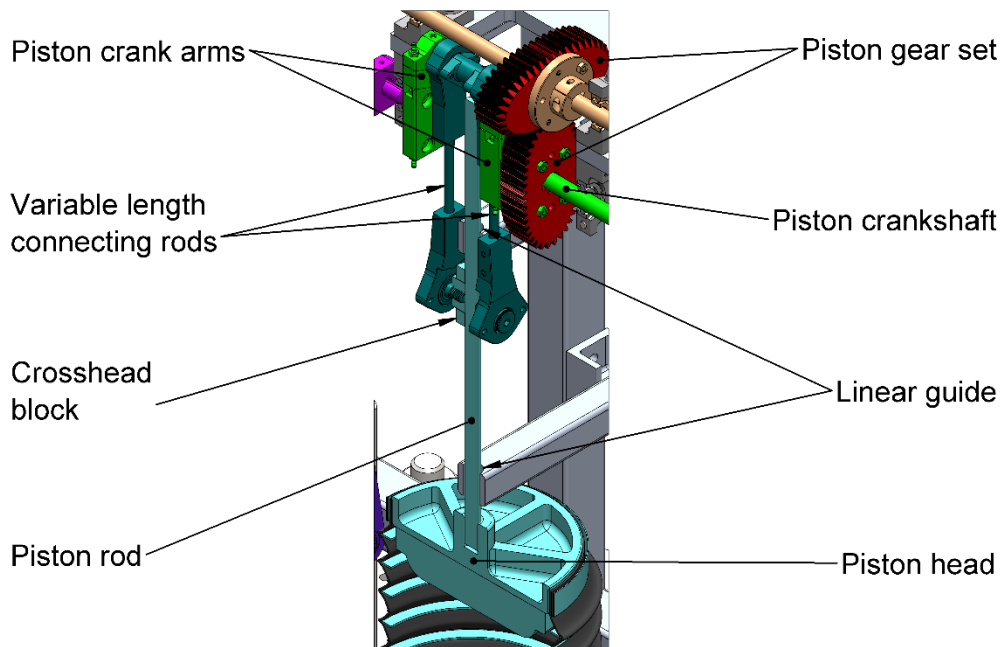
Piston crosshead, connecting rods, and piston crankshaft
